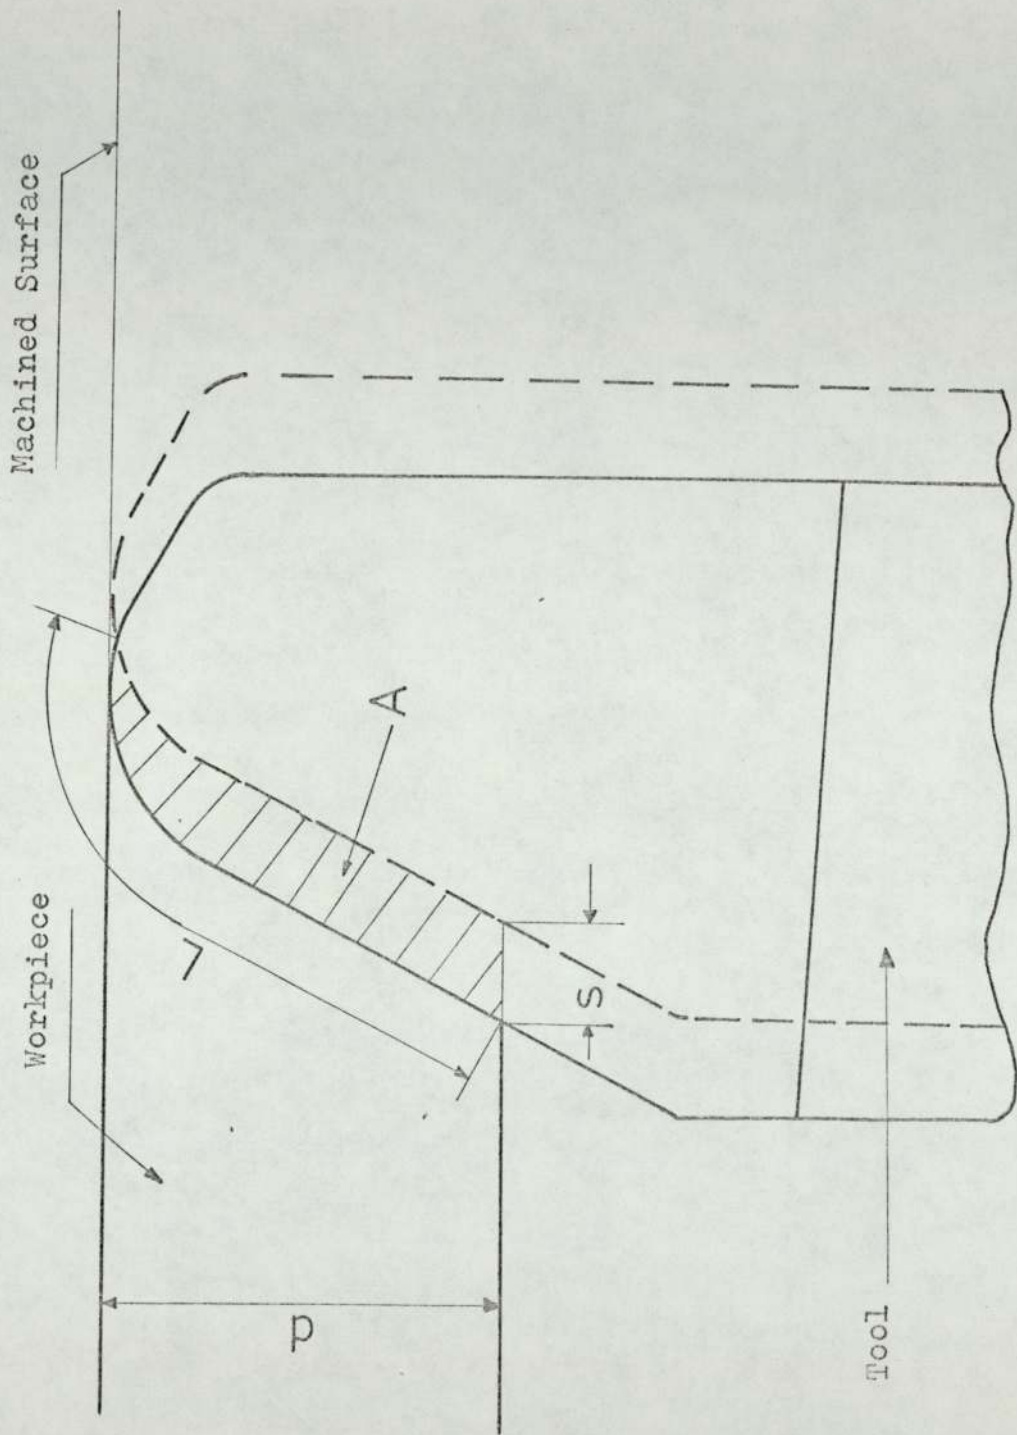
General Configuration of Area Cut A and length engaged with workpiece L
